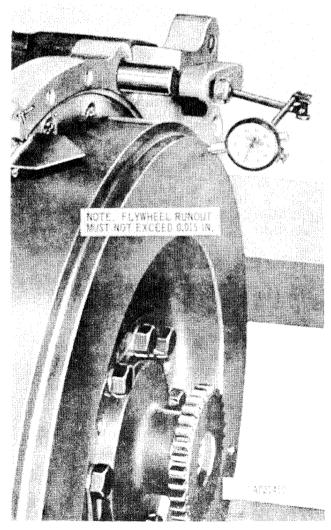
Checking flywheel runout using dial indicator, model AVDS-1790-2C and AVDS-1790-2D engines.
